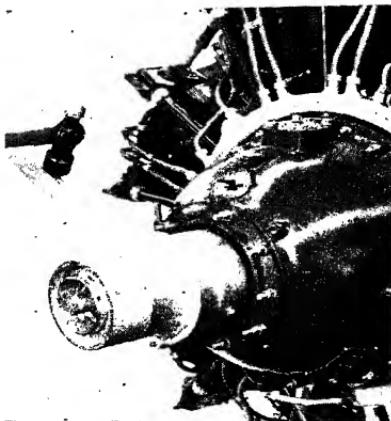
Loosening thrust nut by striking wrench with a hammer. It should only be loosened *one turn* until ready to remove.
